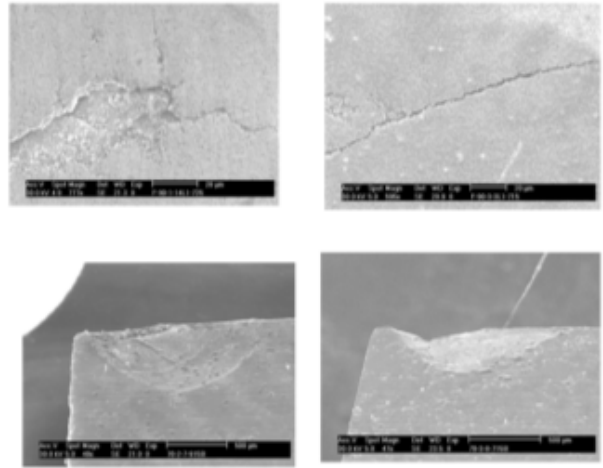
(b) Crack and tool damaged in dry cutting for both coated tools
